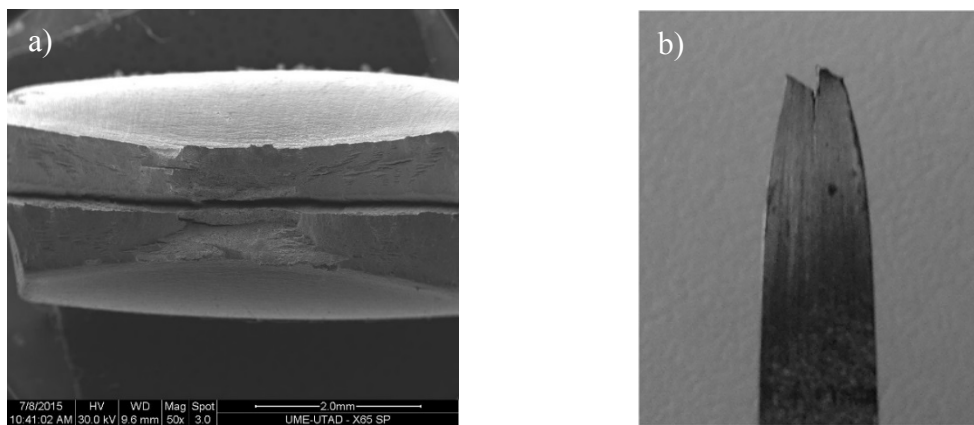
Fracture surface of a smooth plane specimen of X65 piping steel: a) general surface view; b) lateral/side view.
